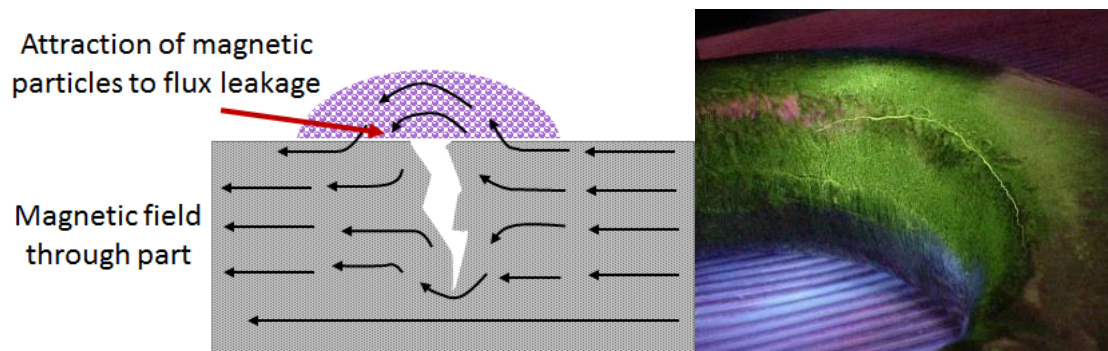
Magnetic particle inspection, working principles (left), with example of inspection on a crane hook, [51], courtesy of the NDT Education Resource Center, Iowa State University, USA.
